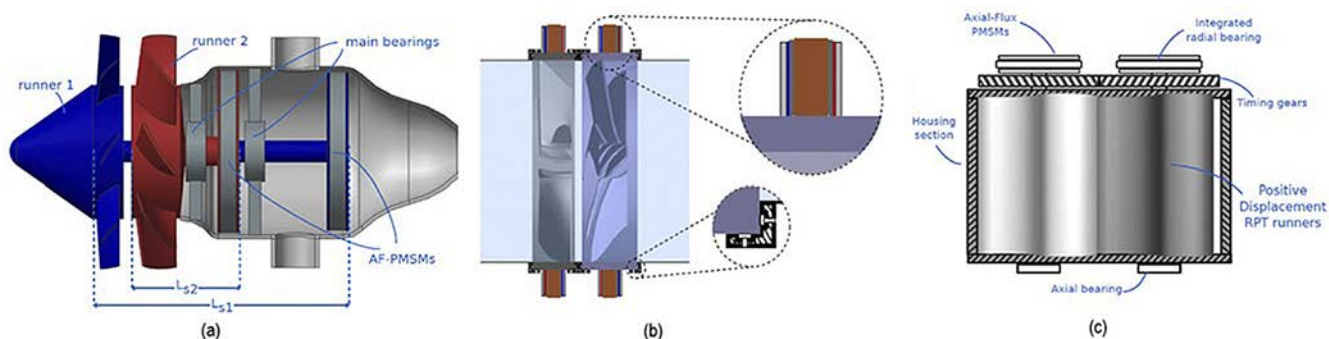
| Power Take-Offs (PTOs) for a) 10 MW shaft-driven contra-rotating reversible pump-turbine b) a 10 MW rim-driven contra-rotating reversible pump-turbine and c) a positive-displacement reversible pump-turbine.
